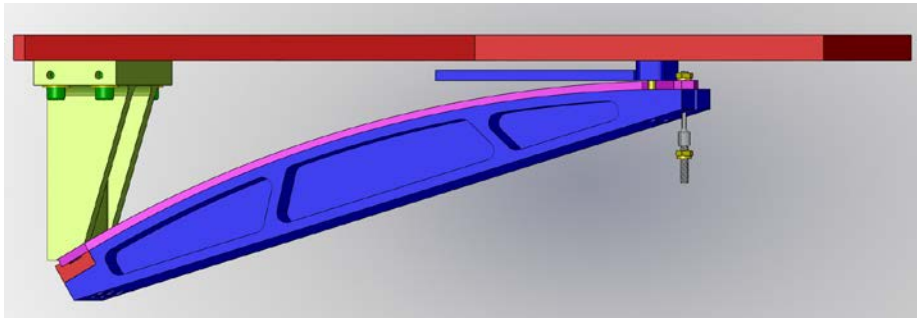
D1200140, Blade Assembly in Post-bending Configuration
